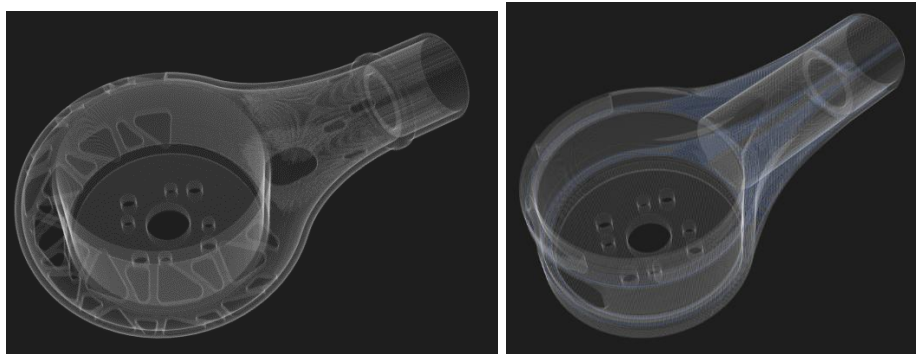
Original Motor Mount (Left) and redesigned Motor Mount (Right) (Eiger)
